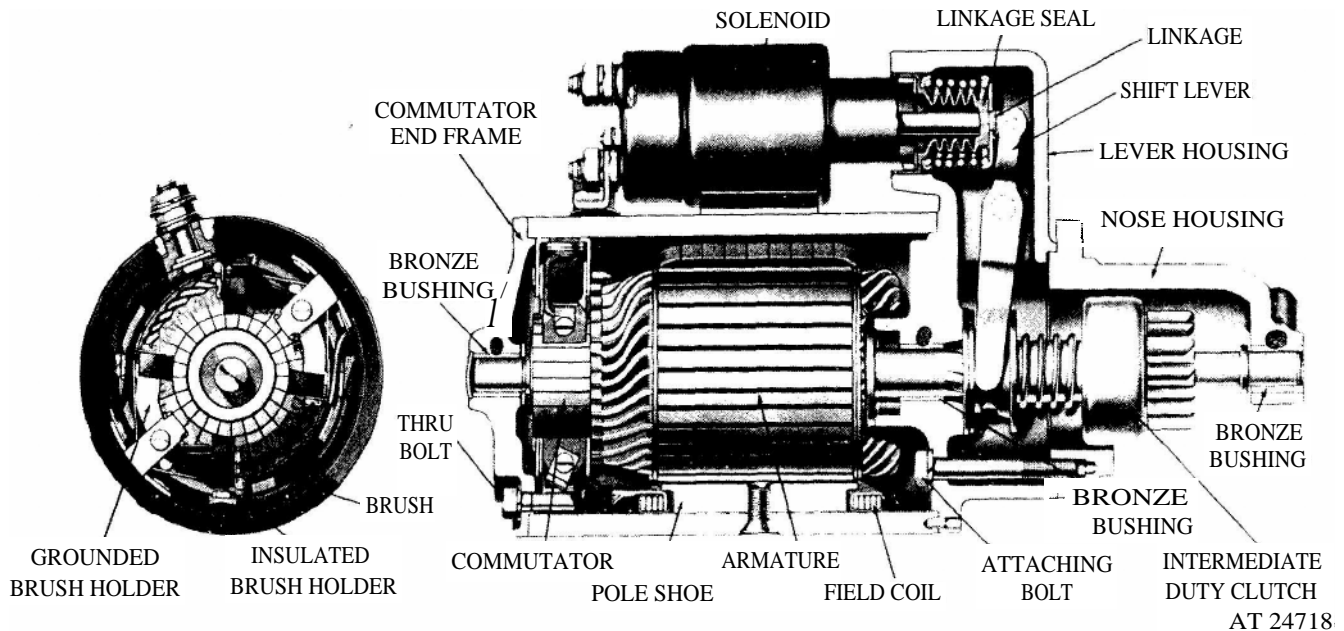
Cross-sectional view of motor with sprag intermediate duty clutch.
